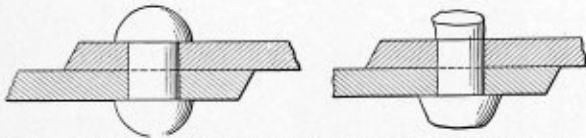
Showing the Buttonhead Rivet Properly and Badly Driven
